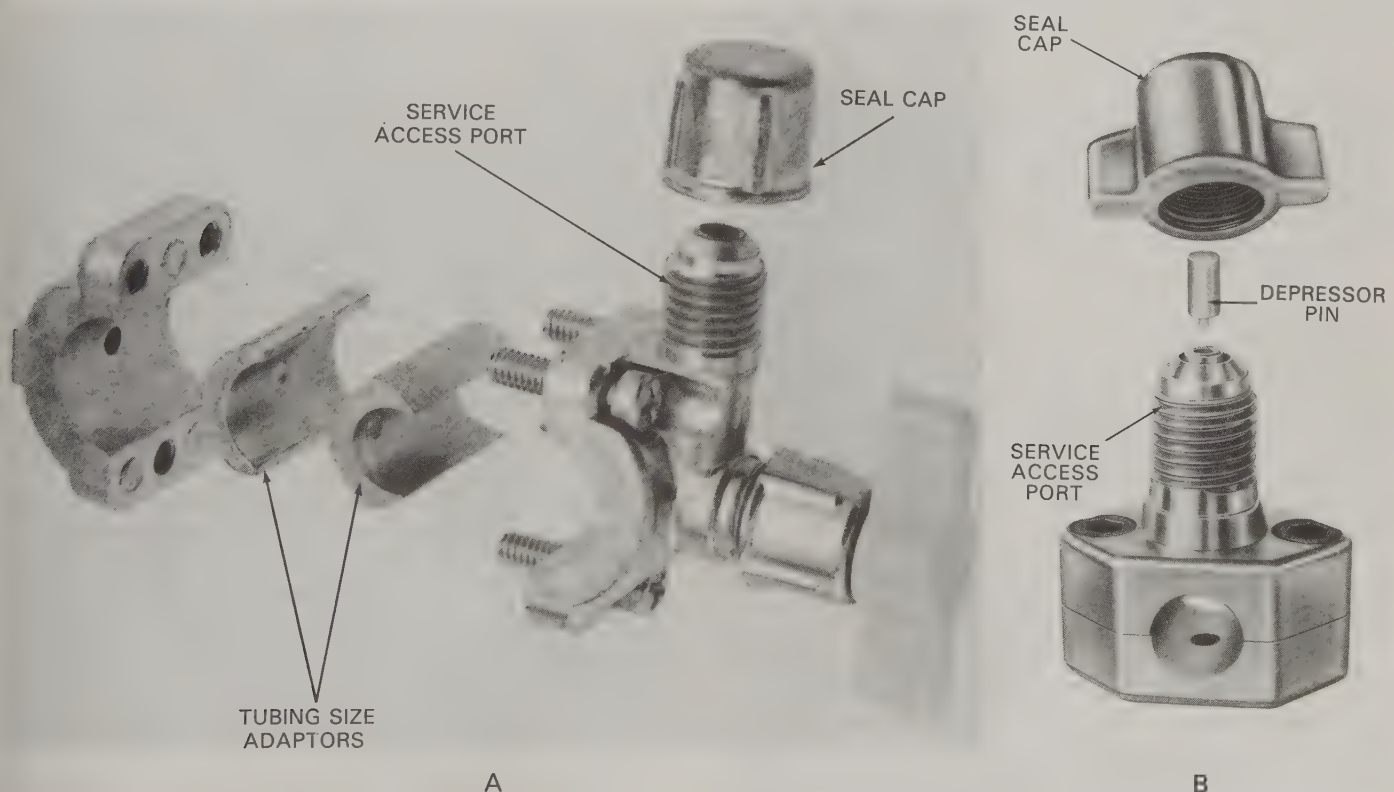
Saddle valves. A—Valve is clamped over tubing to provide an access port for diagnosing system problems. Adaptors permit use on different tubing sizes. B—Depressor pin punctures tubing when cap is tightened. The pin is then removed and the cap used to seal the access port.
